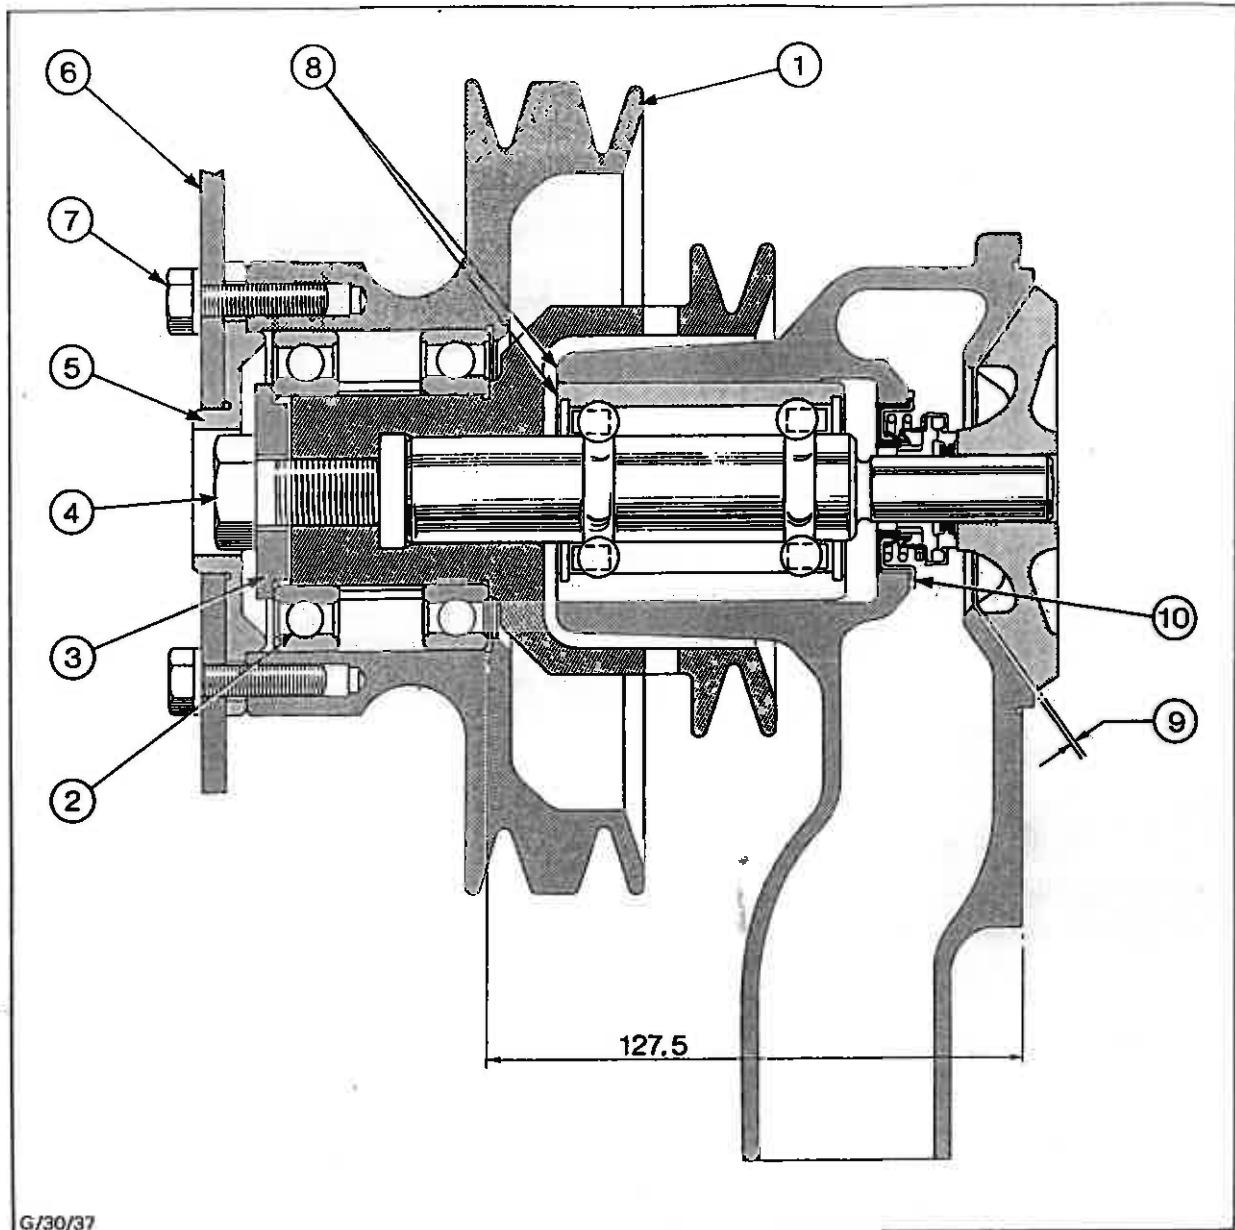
Water Pump Assembly for 'Low Loss' Fan Drive System
